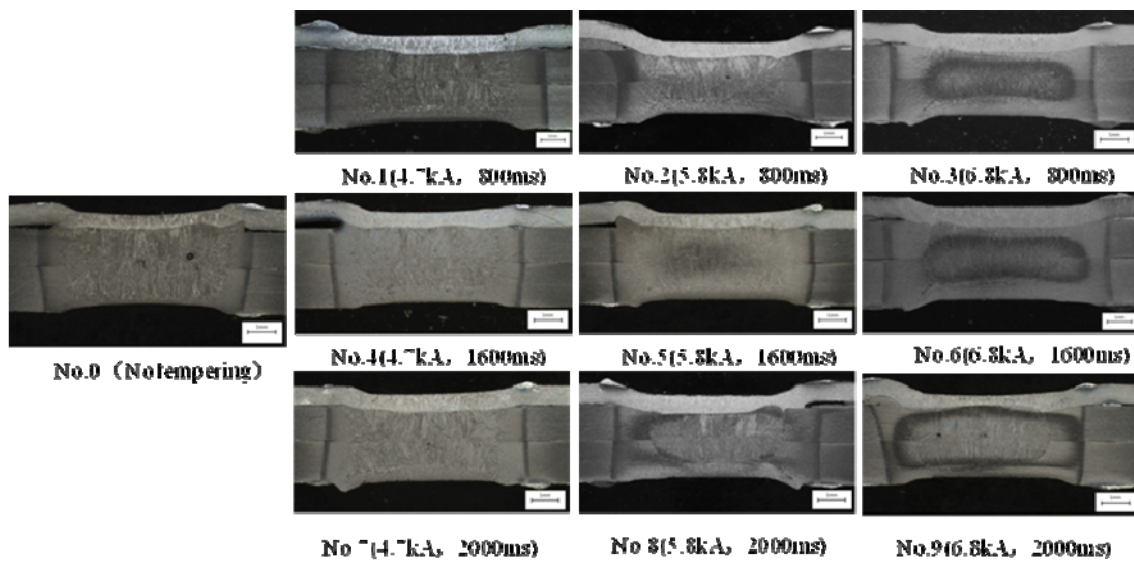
The cross section of weld nugget with different tempering parameters
